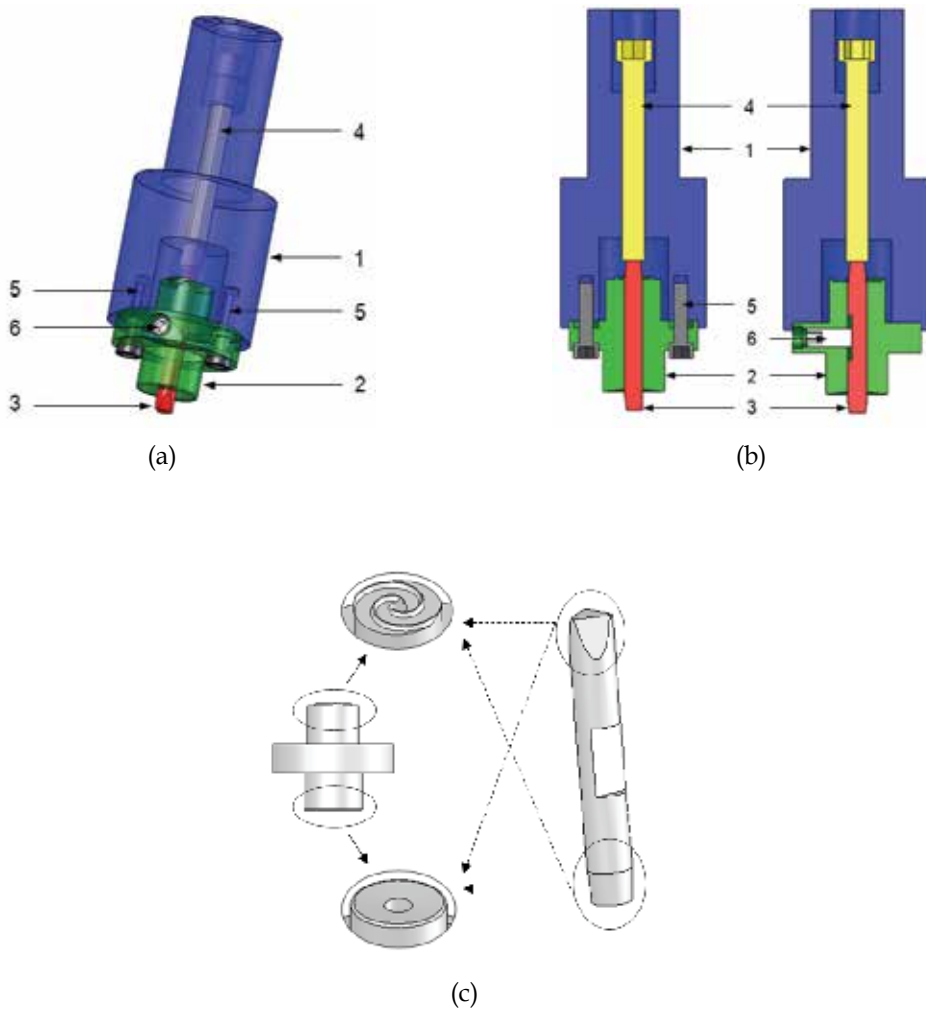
Modular dual FSW tool. a) 3D view of assembly, b) Cutaway view in two perpendicular planes, c) Detail of geometric duality of the dual basis and probe dual. Nomenclature: main body (1), dual shoulder (2), dual-probe (3), vertical adjustment screw (4), bolts of the dual basis (5), dual screw probe (6).
